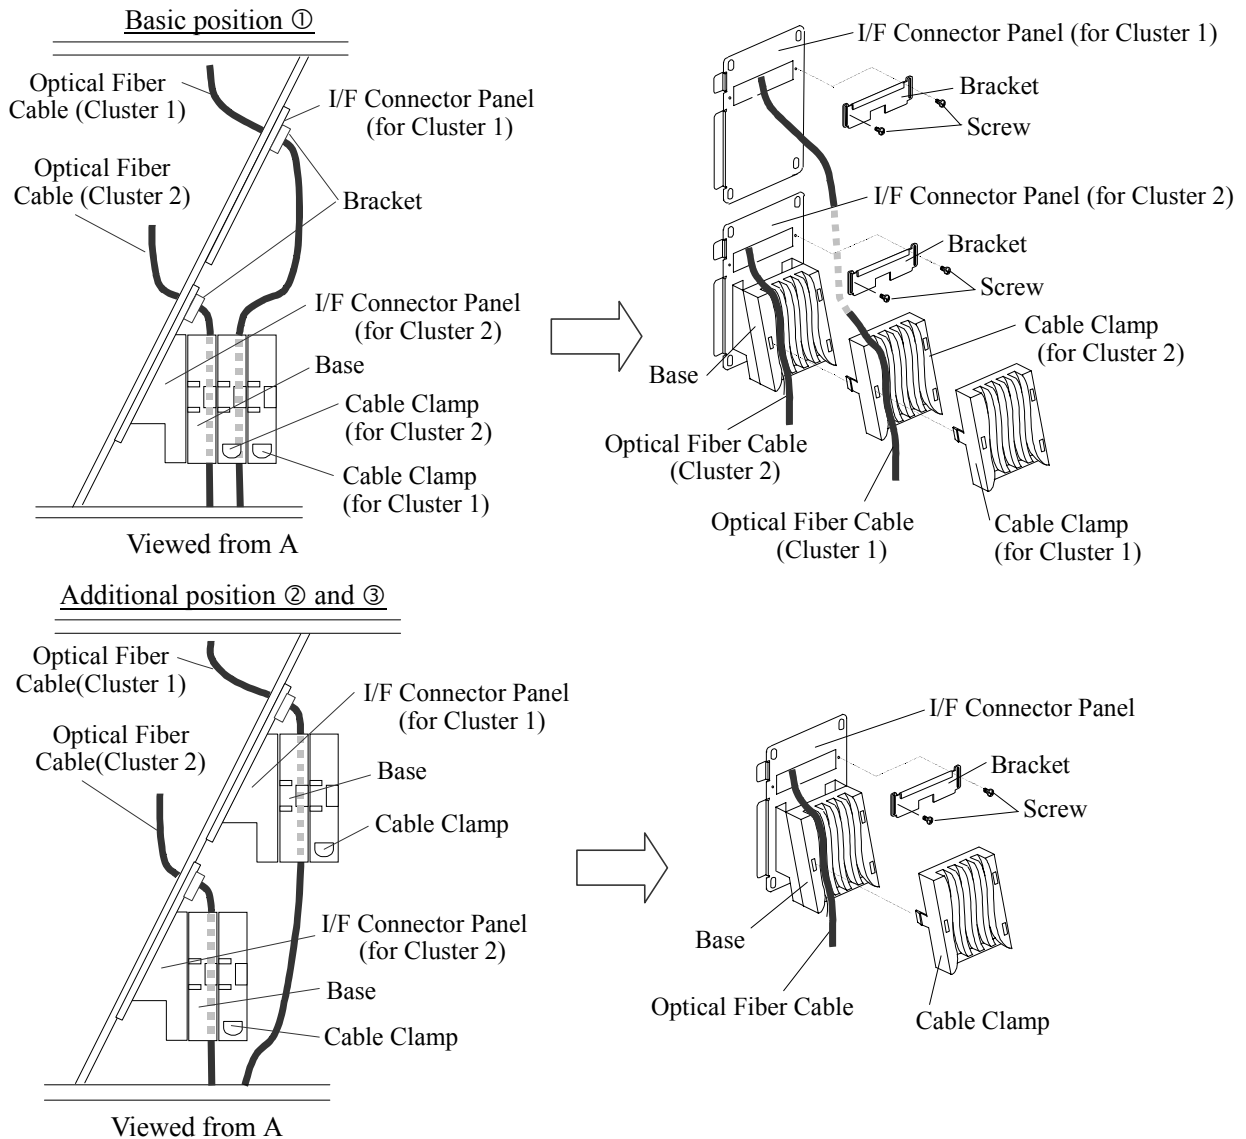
Installation of Optical Fiber Cable
